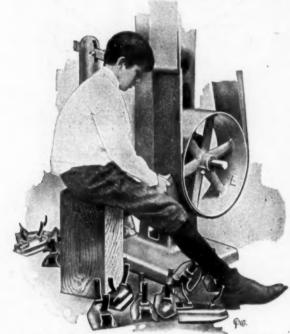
HORIZONTAL BELT POLISHING MACHINE.
